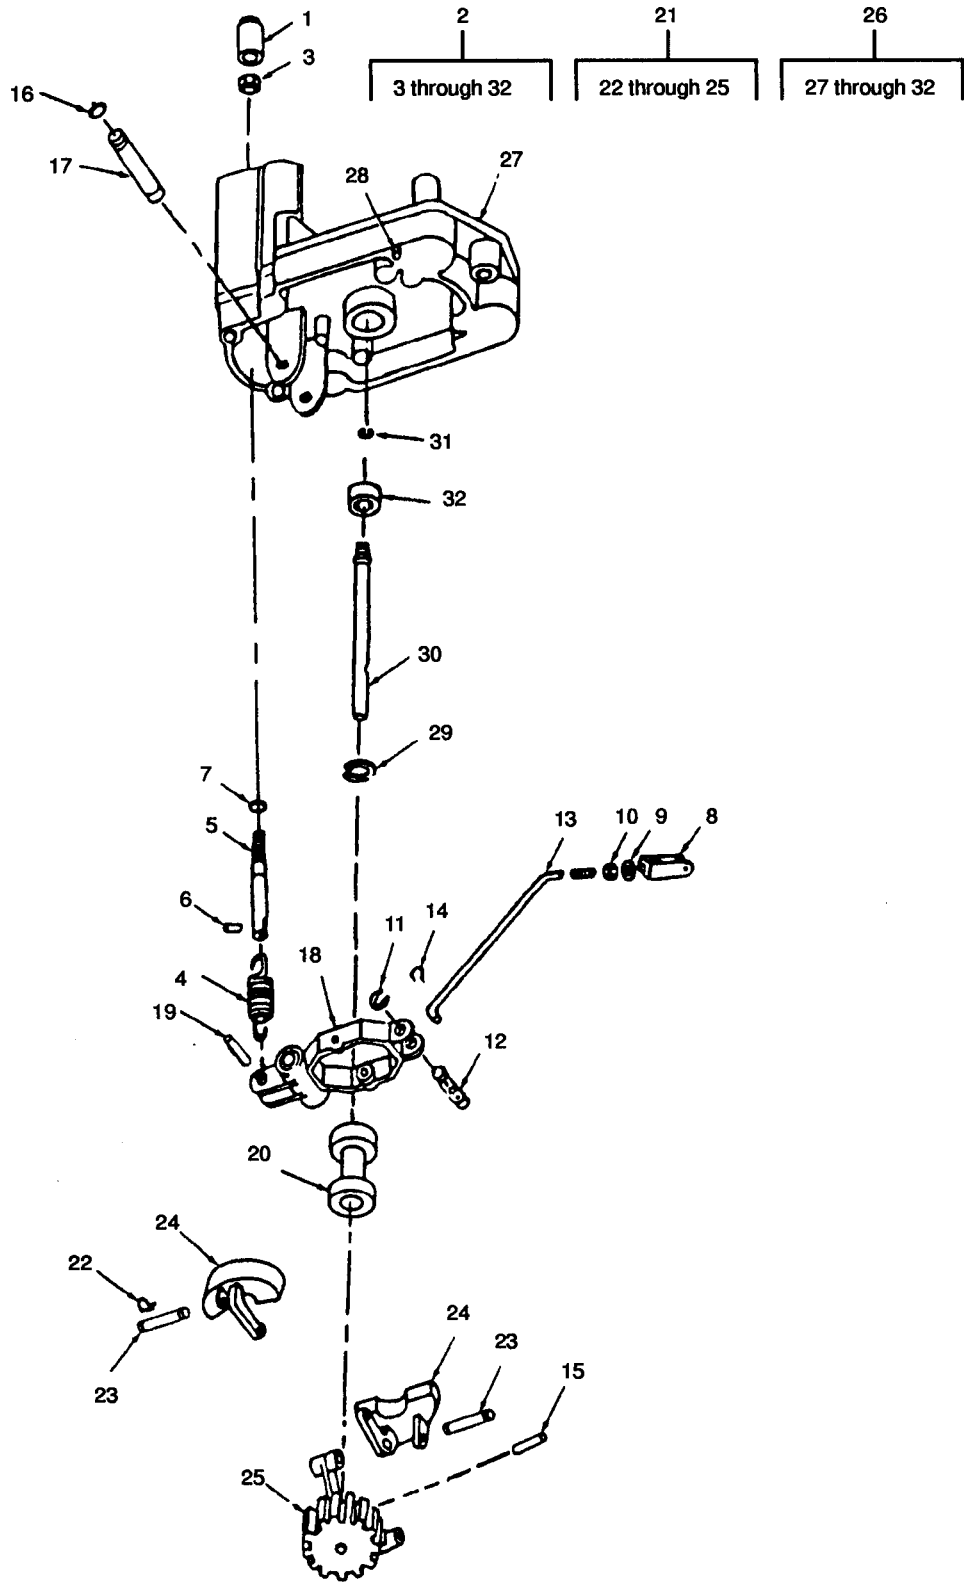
Engine Speed Governor Assembly (with Steel Gear)
